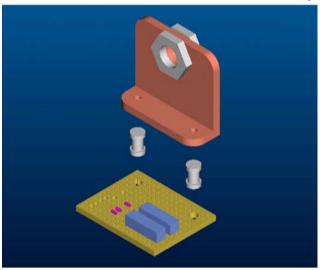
Bracket & PCB Board Assembly (View 1)
